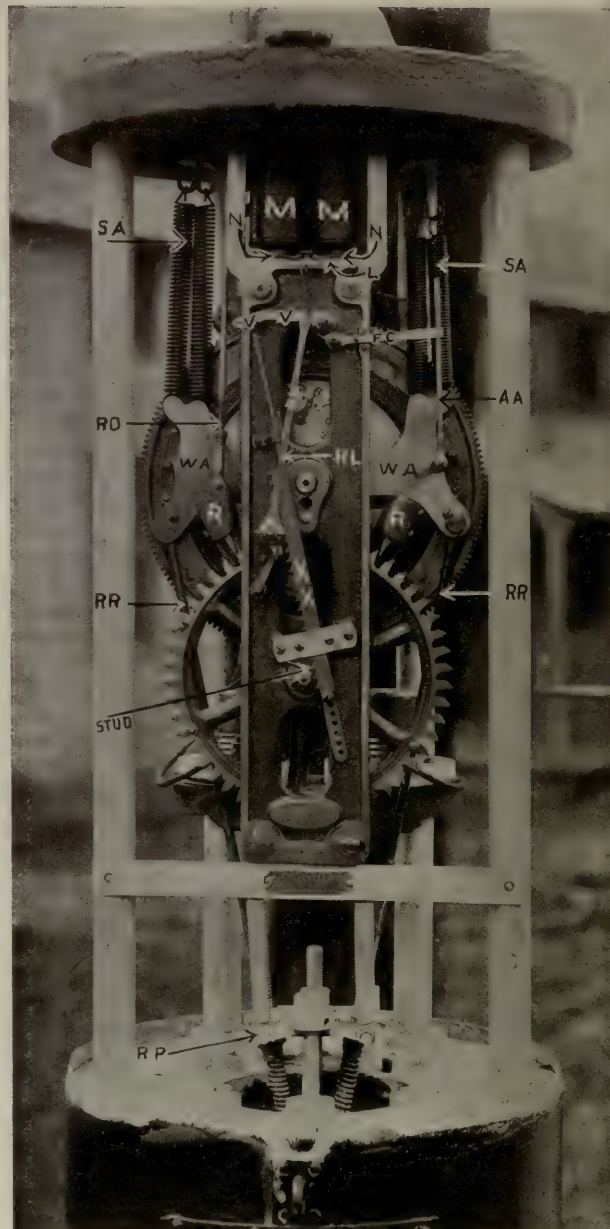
Details of Bell Mechanism. Hoeschen Manufacturing Company.
